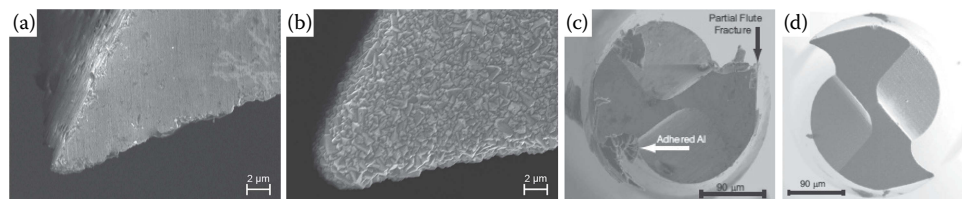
SEM micrographs of (a) fresh uncoated tool tip, (b) fresh FGD-coated tool tip, (c) uncoated tool after machining of Al 6061-T6, and (d) FGD-coated tool after machining of Al 6061-T6
